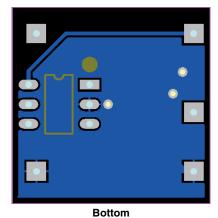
TDFN4 1.2 mm x 1.6 mm PCB Layout
